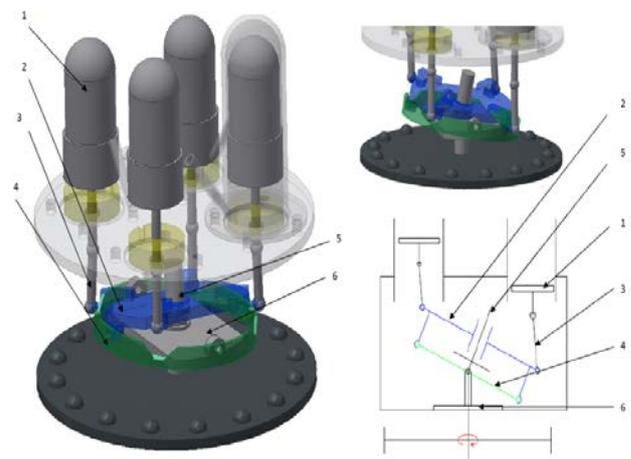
Design of mechanism with ring (general view right side, details of mechanism and scheme- left side): 1-piston, 2-wobble plate, 3- ball joint segment, 4- ring, 5- shaft, 6-fixed plate
